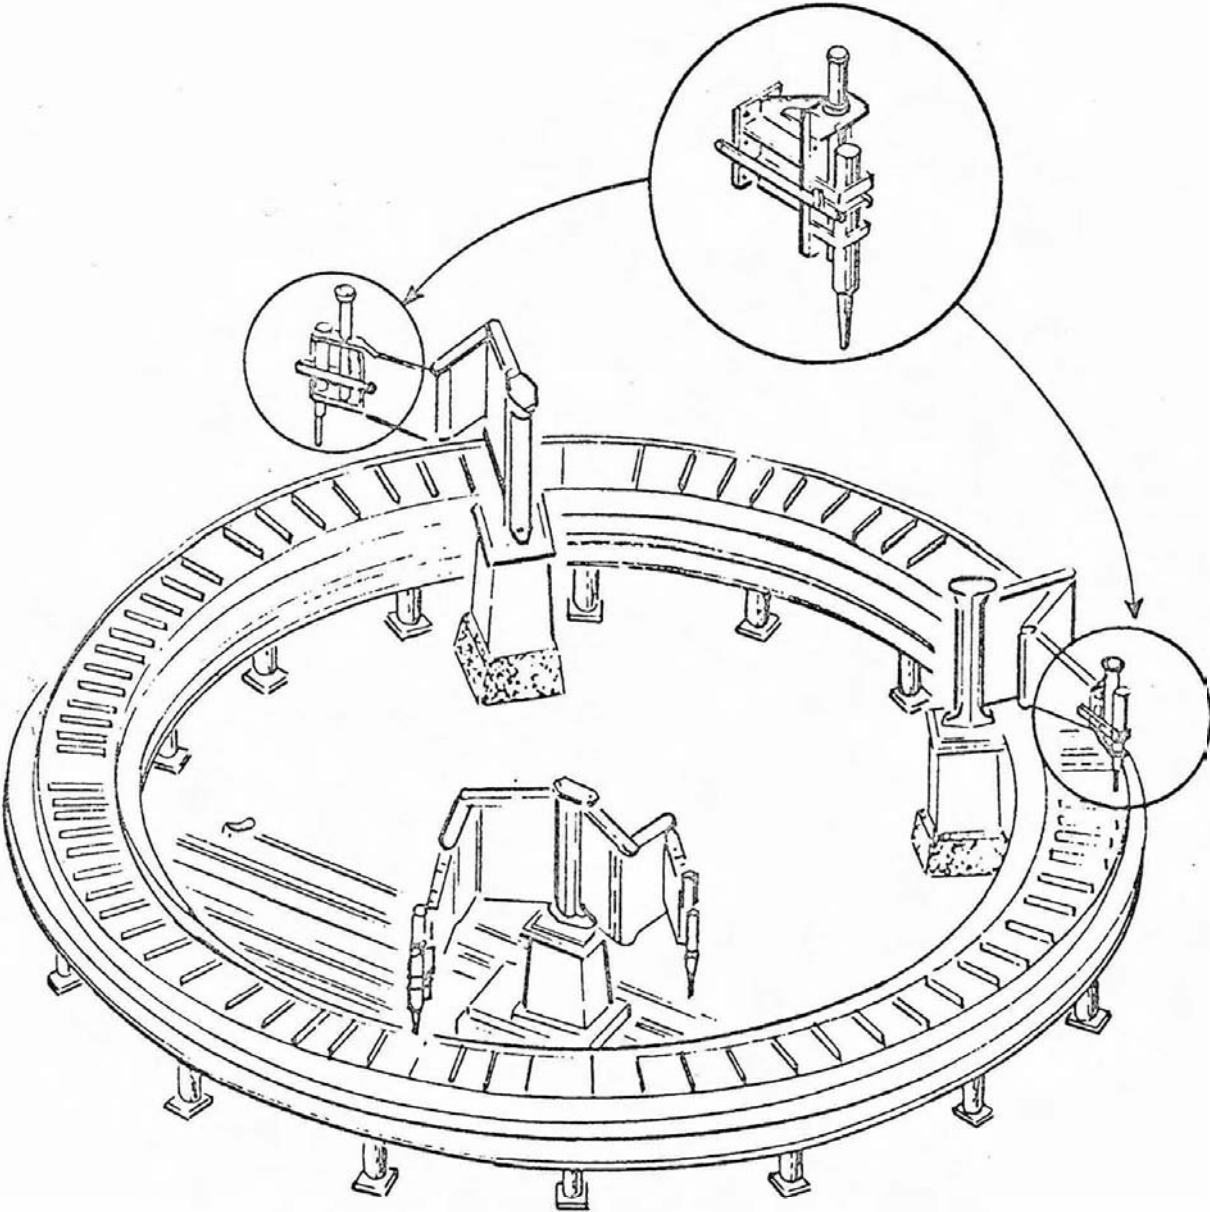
Upper and Lower Thrust Rings Assembly Fixture AF-340-7071
